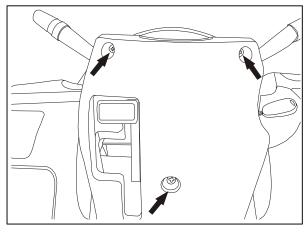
Disassembly of upper and lower cover plate for steering column
